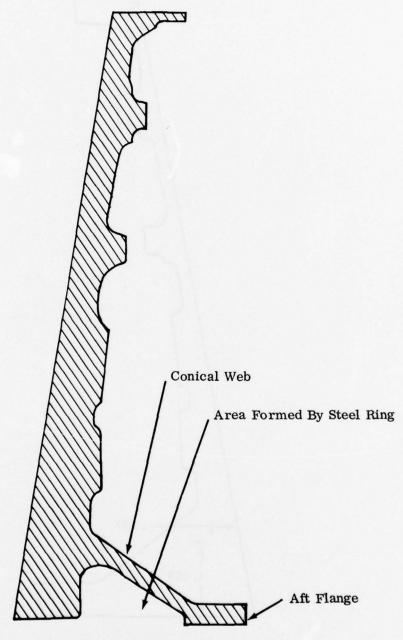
Cross Section of Net Shape Casting Formed by Steel Ring
